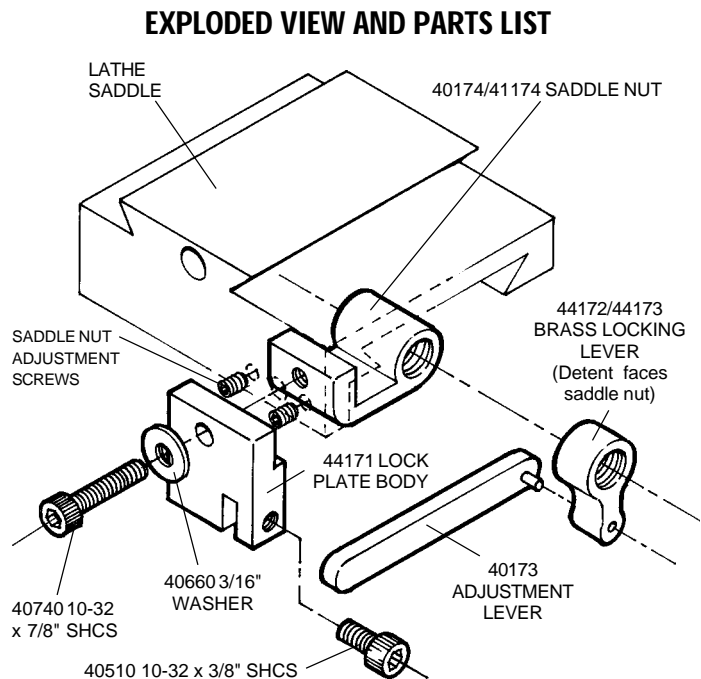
Exploded view shows saddle nut and locking plate in relation to lathe saddle. Lever arm goes through slot in lock plate body and is held in position by 3/8" SHCS after adjusting.
